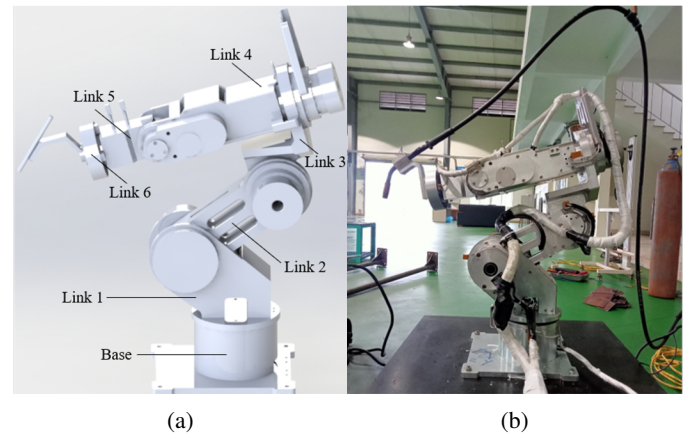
Six DOFs welding robot arm: (a) CAD Model; (b) Fabricated Model.
